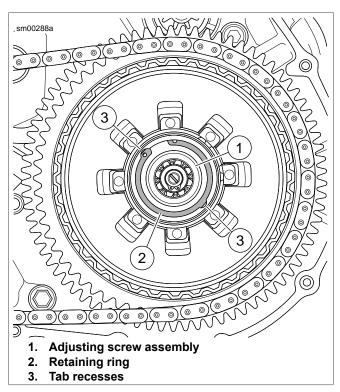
Clutch Adjusting Screw Assembly and Retaining Ring
